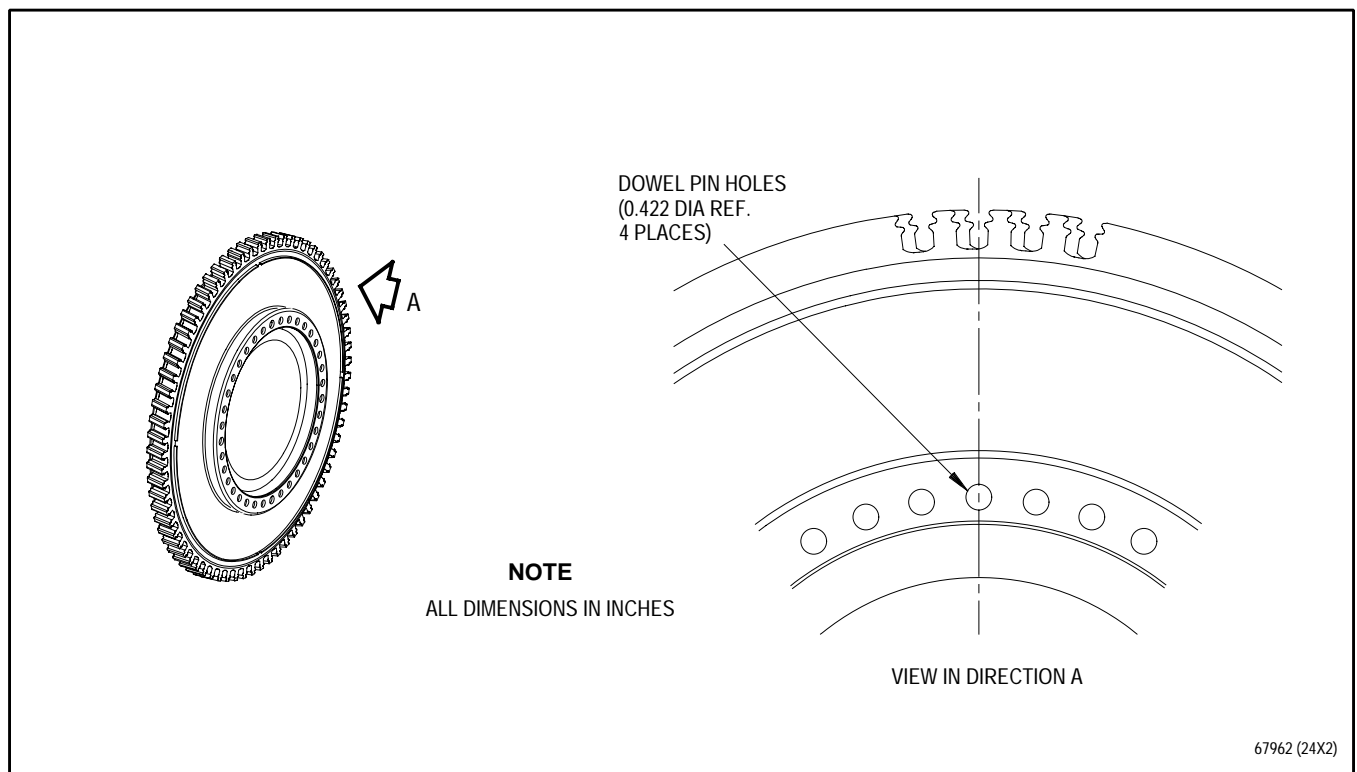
First Stage Turbine Disk - Blending Dowel Pin Holes
